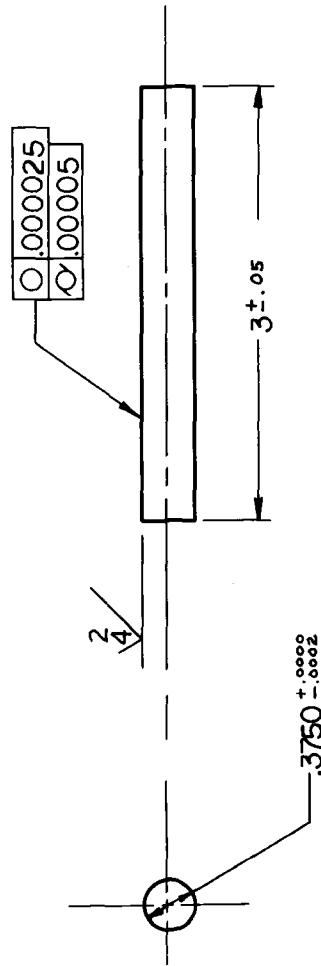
Test specimen design. The measurements are in inches; 1 in. = 25.4 mm.
